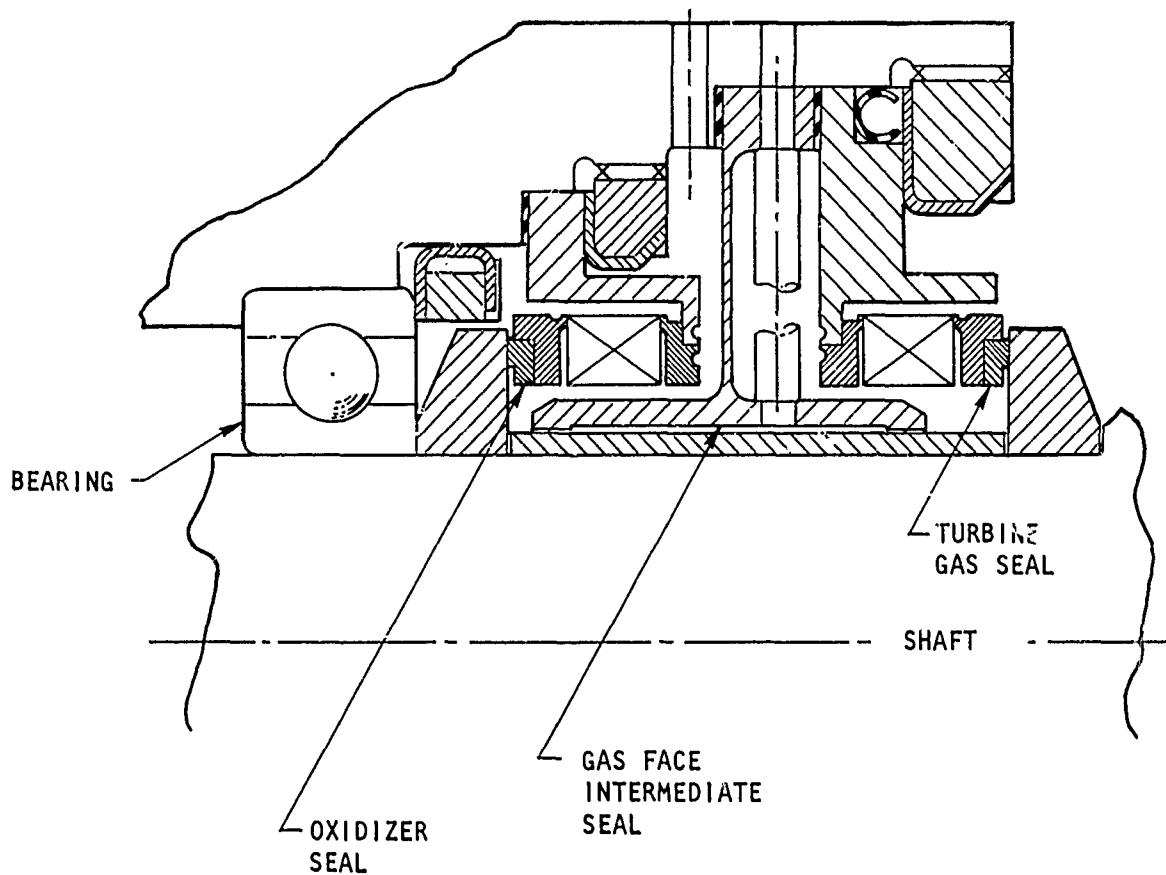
Main Engine Oxidizer Pump Turbine Seal Design
